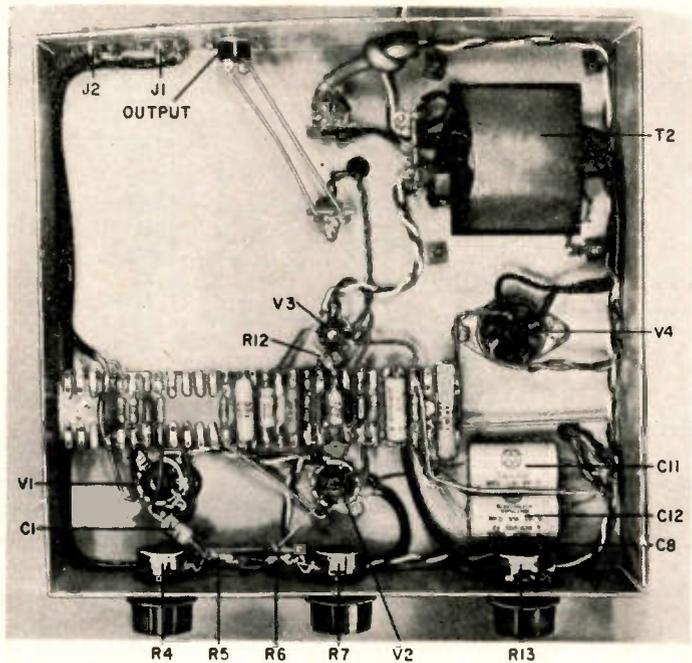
All controls, including optional power switch, should be mounted on front apron of chassis. Rear apron can be machined to accept input jacks and output socket and provide convenient entry for power cord.
